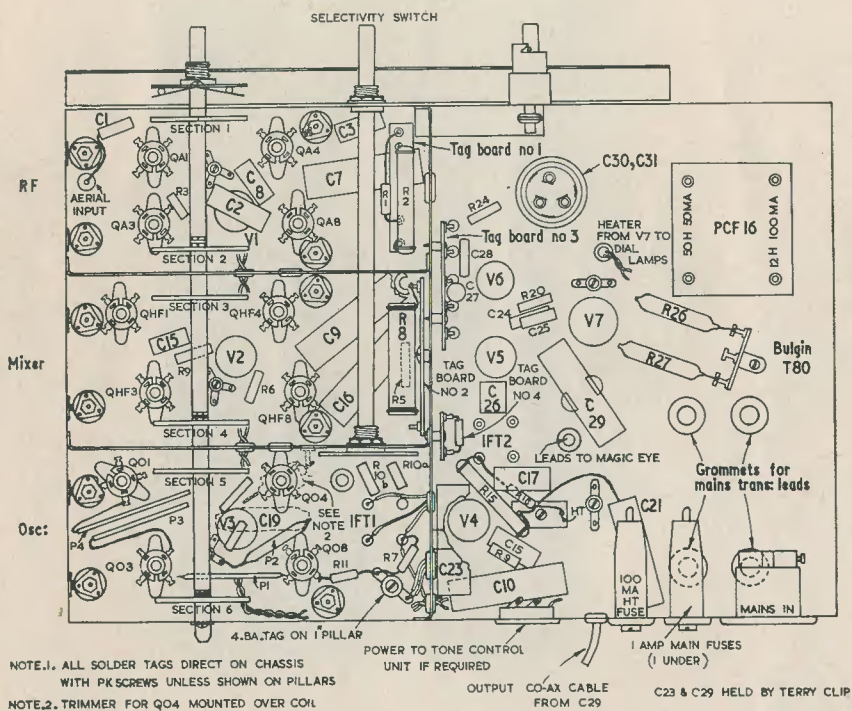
PLAN VIEW OF UNDERSIDE OF CHASSIS, LOCATING COMPONENTS
